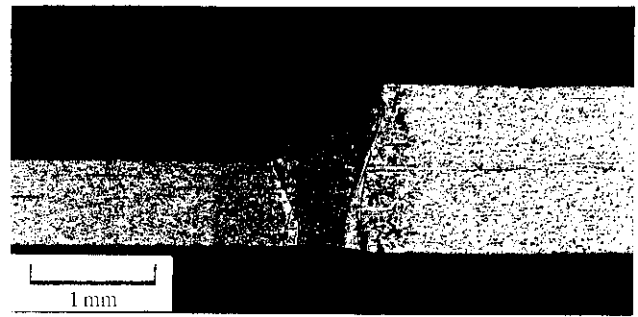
Example of the laser welded joint of the sheets of different thickness, i.e., 0.7 and 1.4 mm in thickness, welding condition; 4.6 kW, 4 m/min
